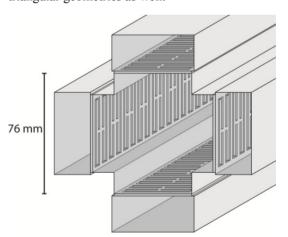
Metamaterial waveguide assembled from four WR187 waveguides (47.55 x 22.15 mm) with CSRRs machined into inner face of assembled structure.
